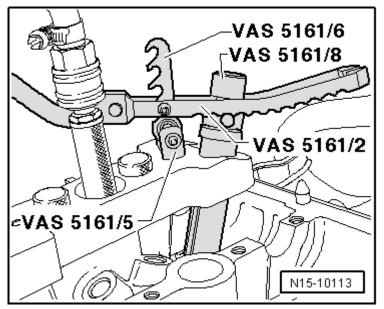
Identifying Pressure Forks VAS 5161/2 Engaged Courtesy of VOLKSWAGEN UNITED STATES, INC.
